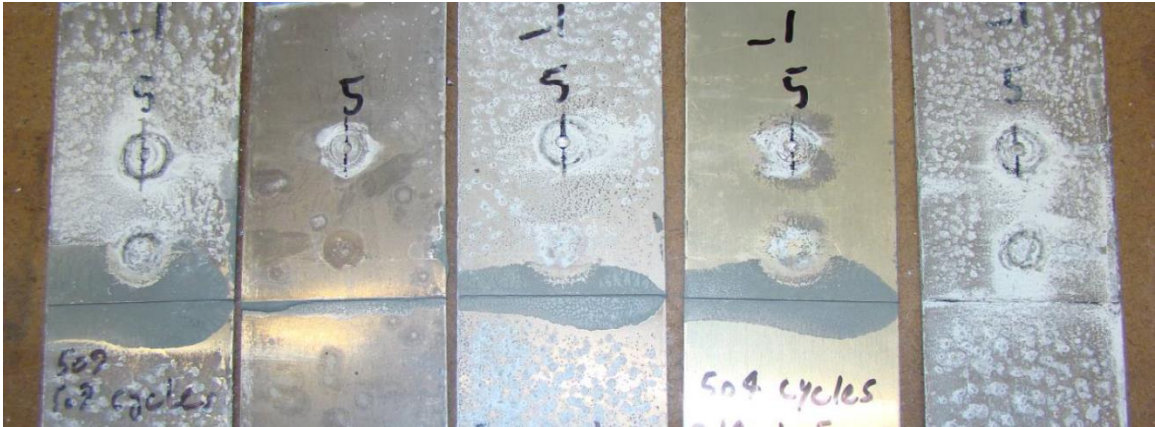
Corroded Swept Spot Weld Specimens (left to right): Bare with Sealant, AlClad with Sealant, CAA with Sealant, Alodine with Sealant, Bare without Sealant [161]
